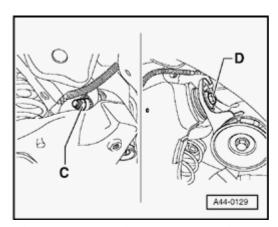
Removing Front Interior Trapezoidal Control Arm/Subframe Connection Nut & Installing New Nut
